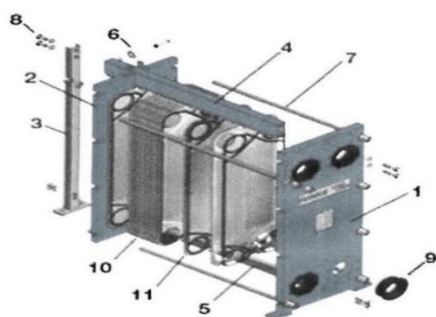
Exploded view of a typical Gasket Plate Heat Exchanger: 1 - fixed plate; 2 - pressure plate; 3 - support; 4 - carrying beam; 5 - lower plate guide; 6 - carrying roller; 7 - tightening bolt; 8 - fixing bolt; 9 - rubber liner; 10 - gasket; 11 - heat transfer plate.
